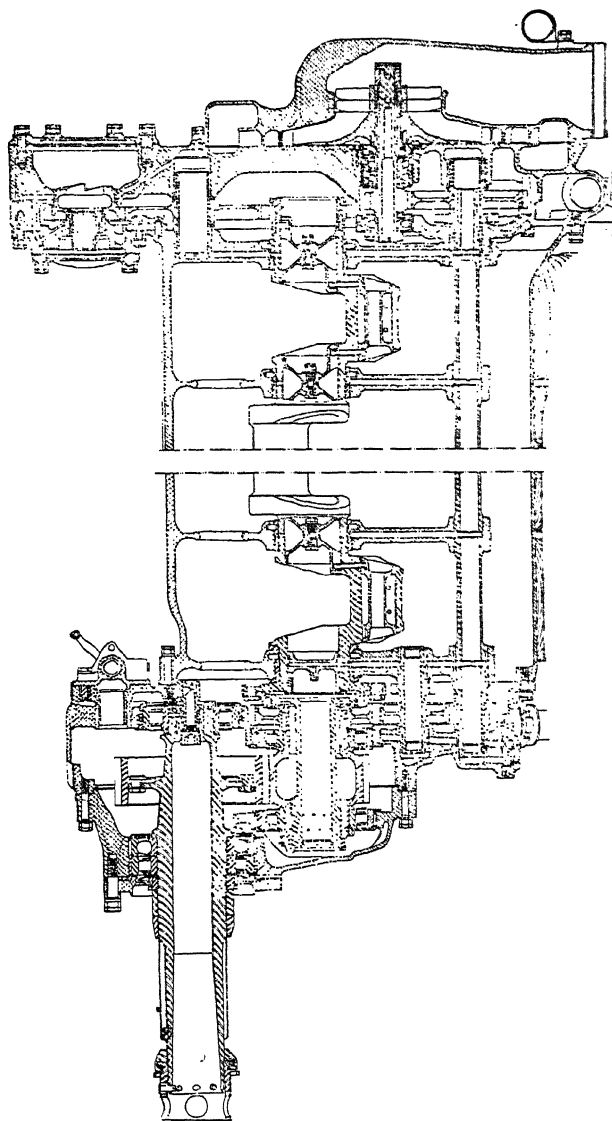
The crankshaft, supercharger, airscrew reduction gear, etc., of twelve-cylinder inverted Vee-type "Ranger" engine.
